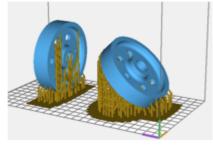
Blank gear oriented vertical left, 45 grad right to study the printing dimension
